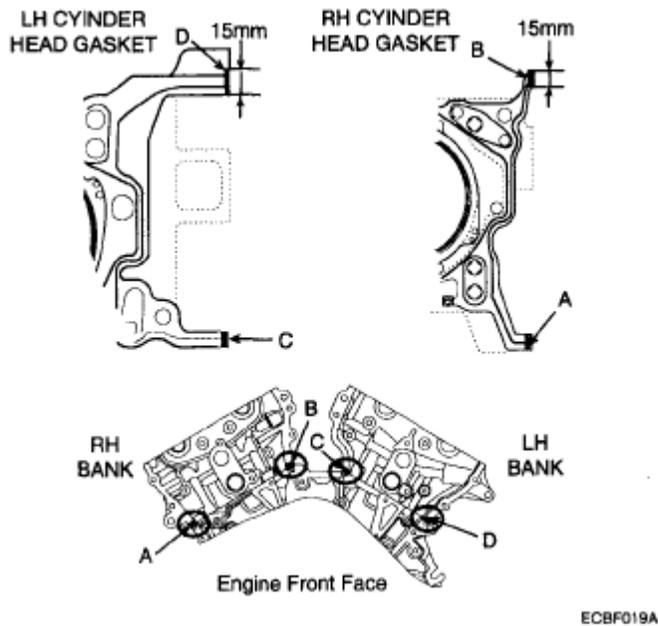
Assembling Cylinder Head Gaskets On Cylinder Block
